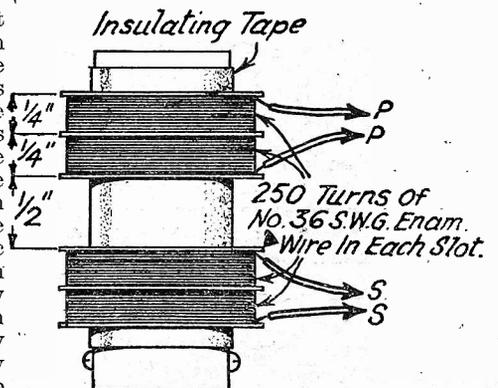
Principal dimensions and winding particulars for the I.F. transformer.
